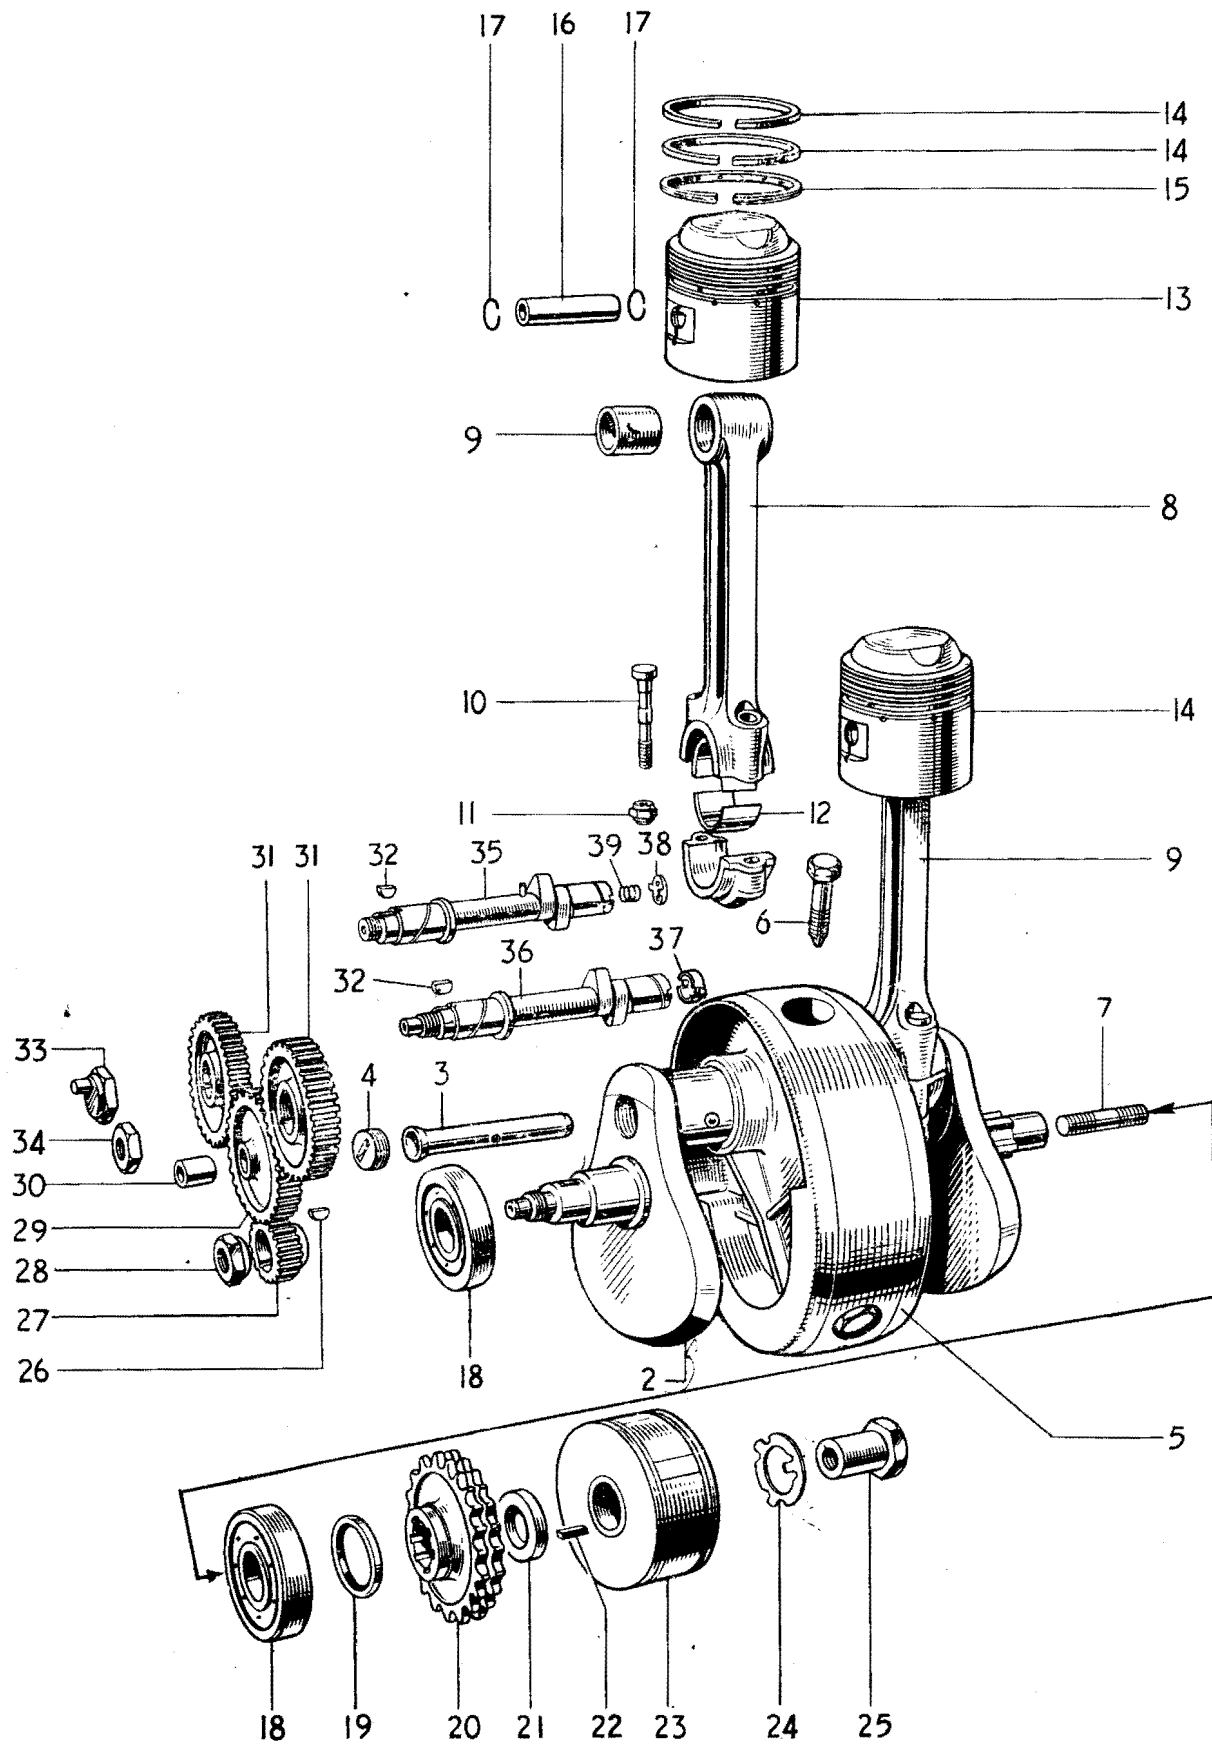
CRANKSHAFT AND CONNECTING RODS
